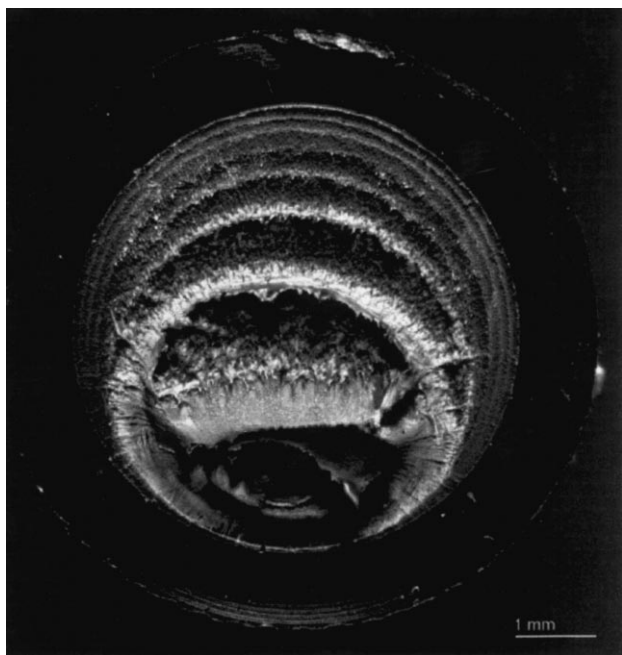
Brittle fracture surface: FNCT creep failure at 60°C under 5 MPa (resin B).
